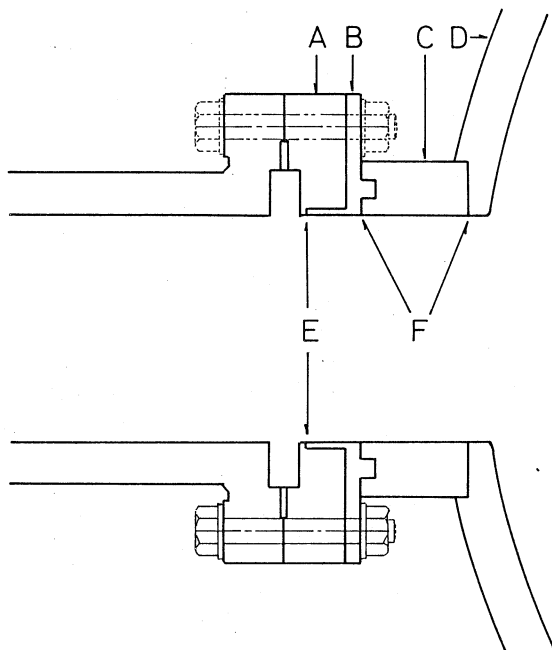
Schematic drawing of the housing of the tuning plunger. A: vacuum flange, B: transition piece, C: port, D: cavity body, E: He-arc welded part, F: silver-brazed parts
